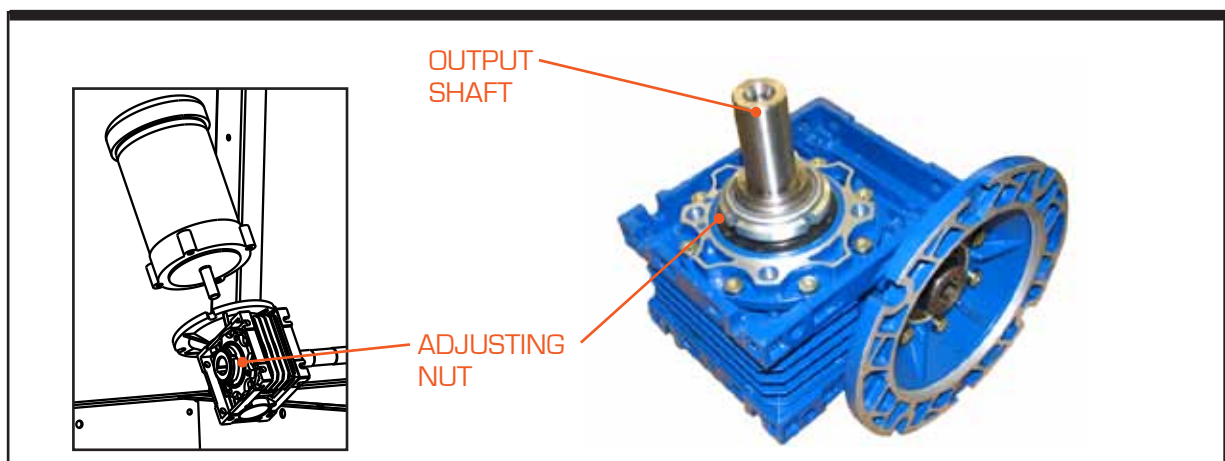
Motovario Reducer - Torque Limiter Adjustment
